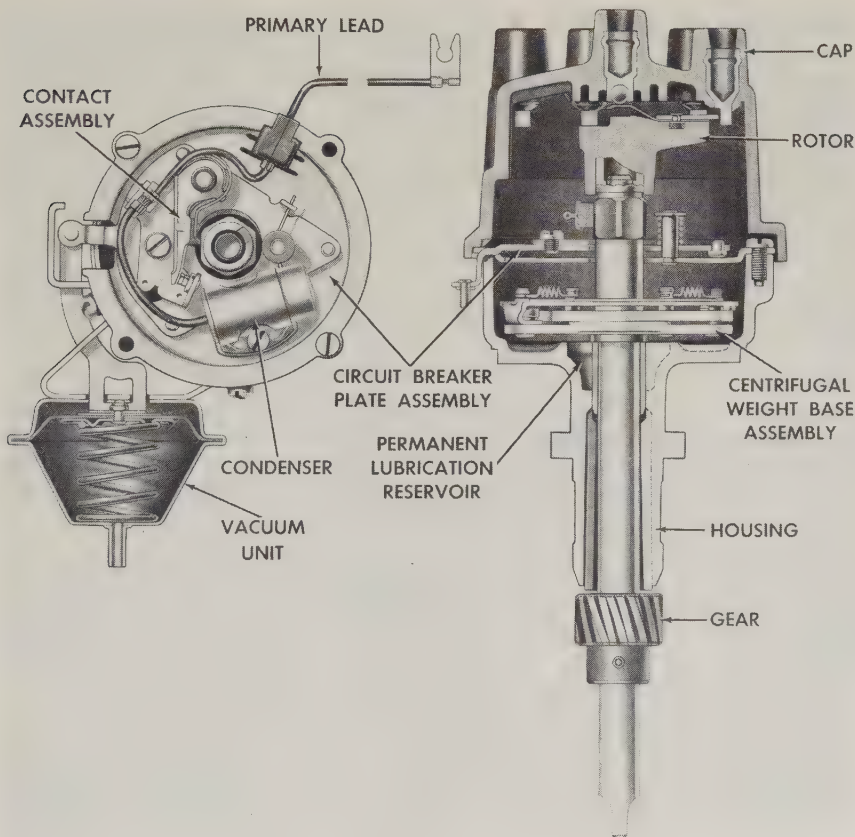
Sectional and top views of an ignition distributor. In the top view, the cap and rotor have been removed so that the breaker plate can be seen. (Delco-Remy Division of General Motors Corporation)
